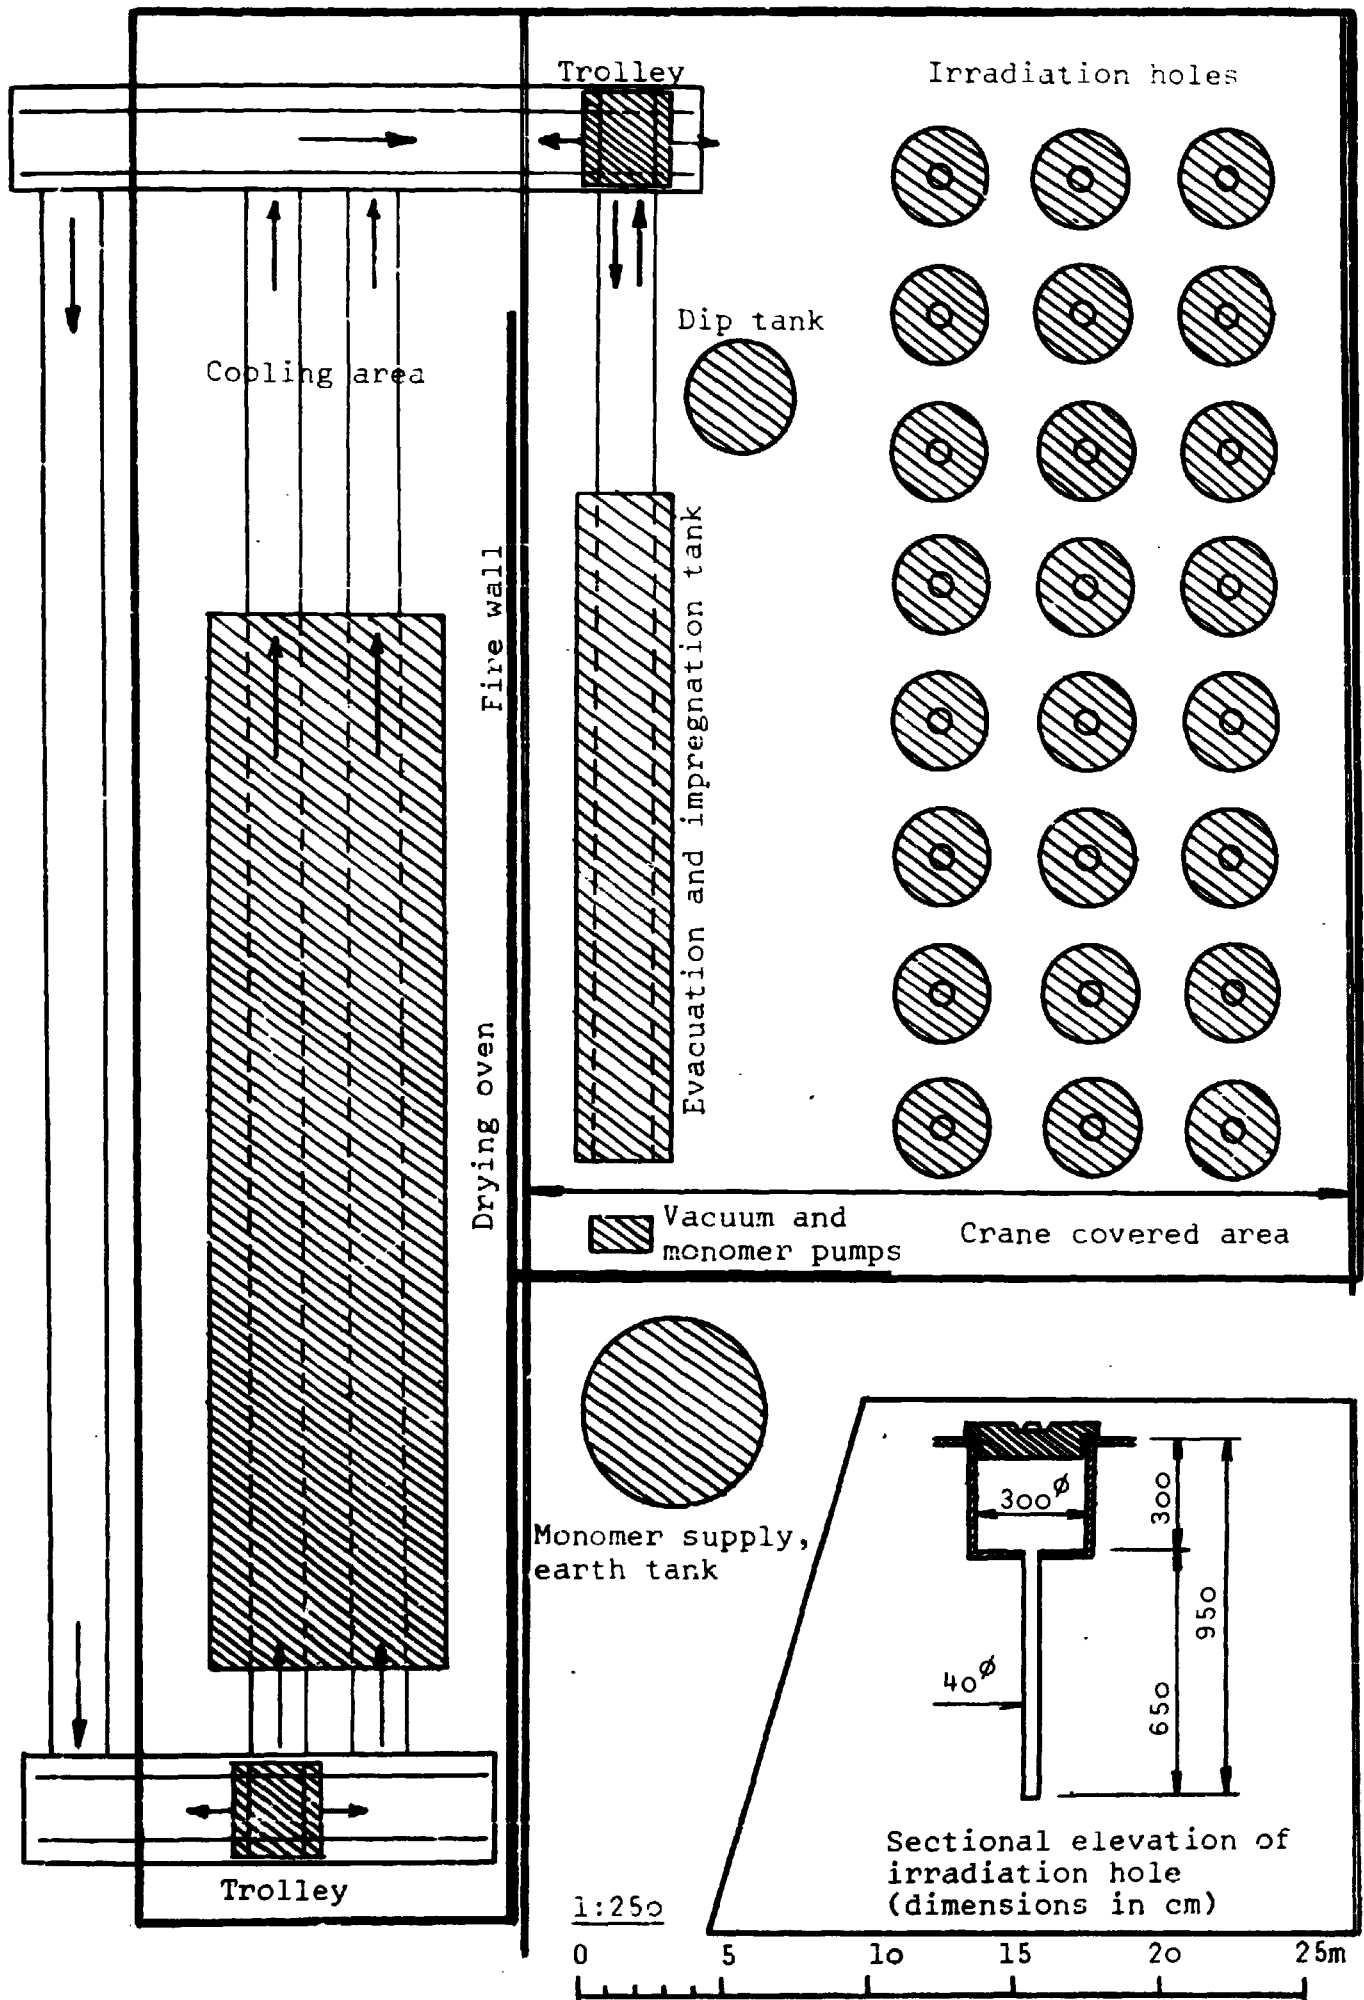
Plant lay-out for impregnation of large concrete pipes.
